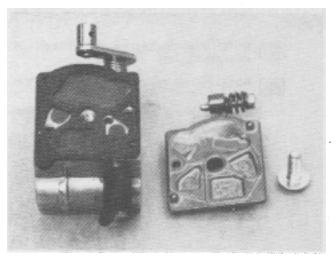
Assemble the pump diaphragm and gasket on carburetor body making sure there are no wrinkles.
